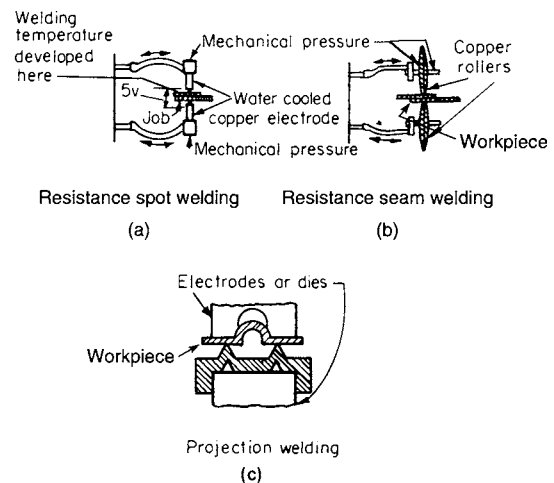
(a) Resistance spot; (b) resistance seam; (c) projection welding.
